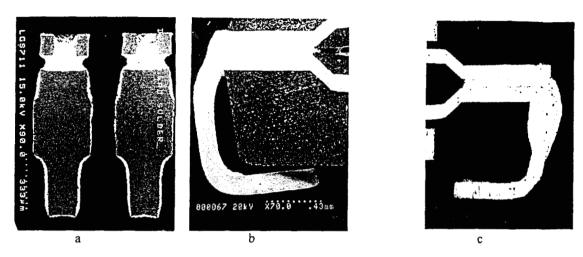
Solder shape of D2CSP after reflow (a) end view, (b) acceptable solder joint, and (c) unacceptable excessive solder
